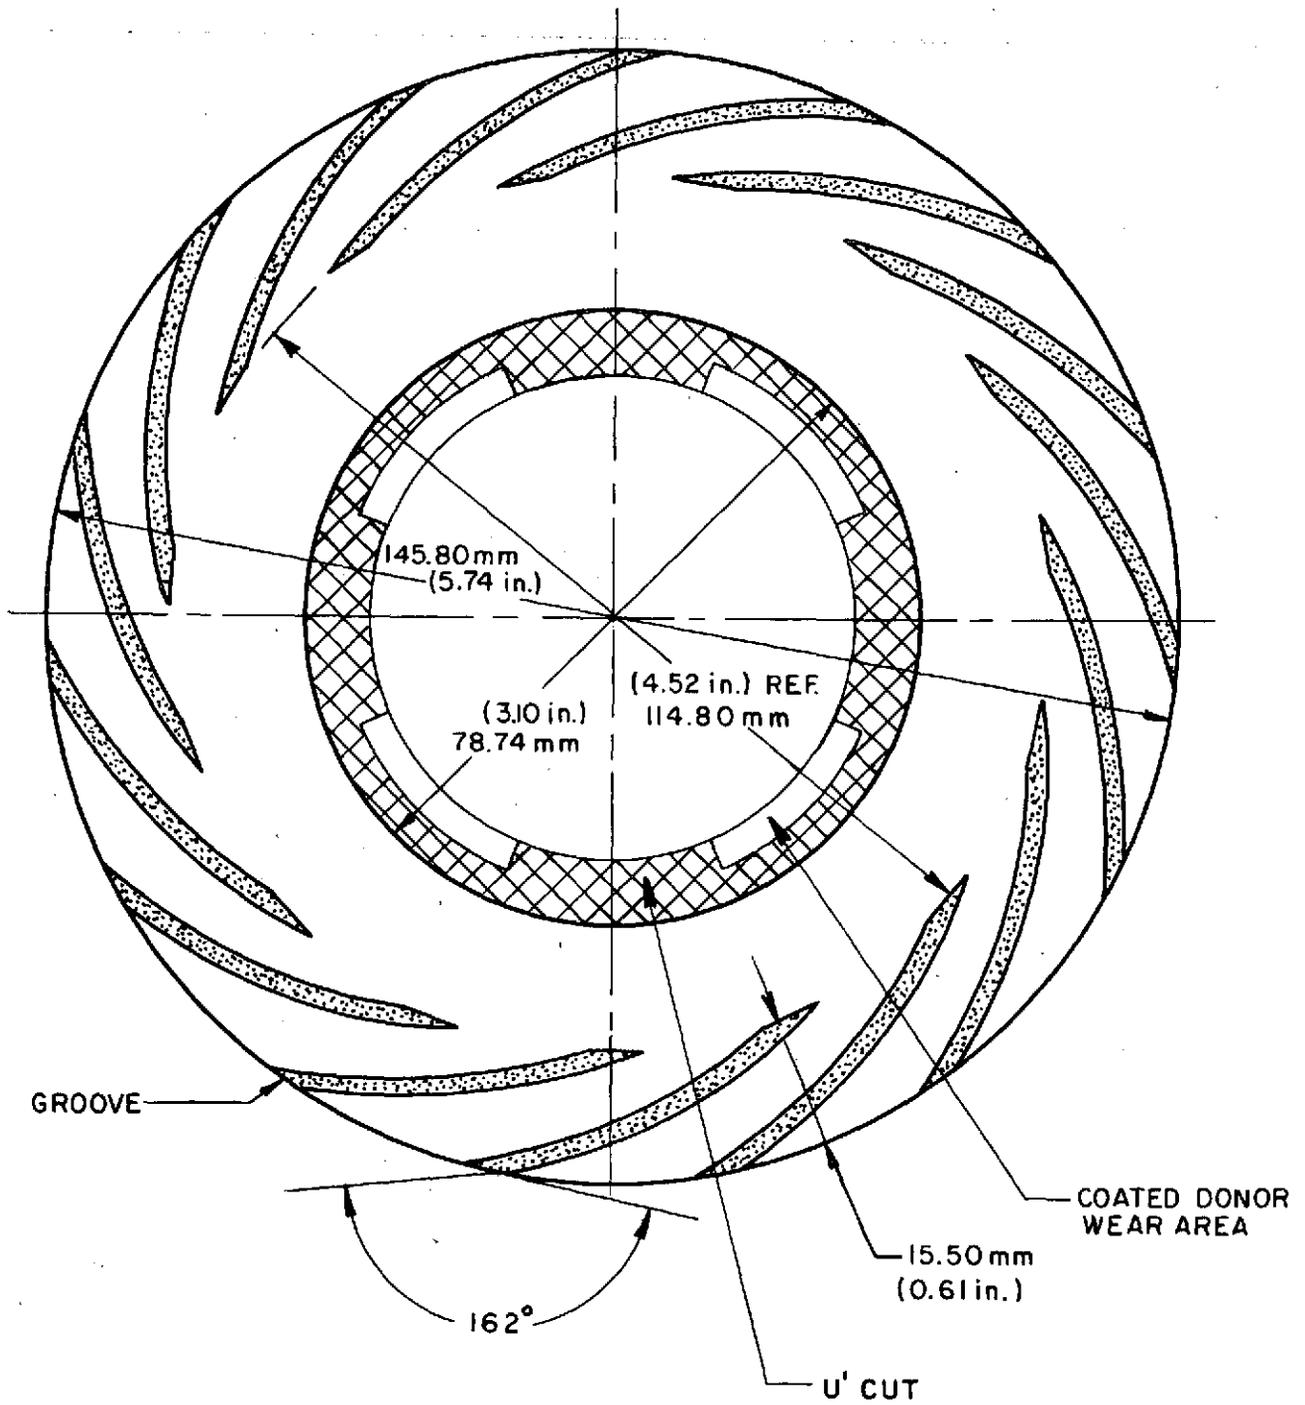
Spiral Groove Thrust Bearing With Donor Wear Areas
